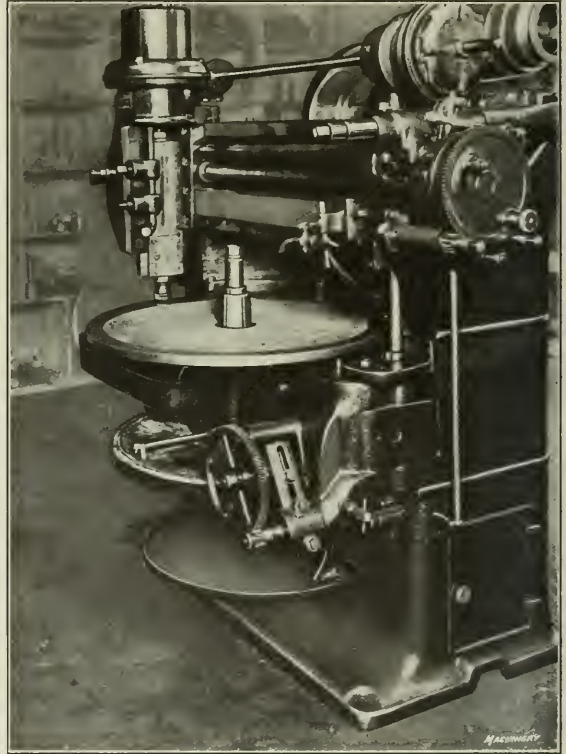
Graduating Circular Table with a Fellows Gear Shaper
